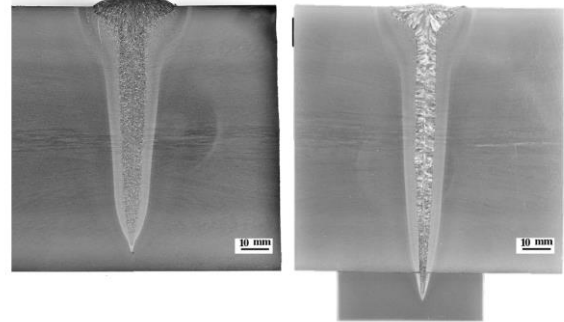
Macrograph. Left, butt welding, without filler. Right, butt welding with Ni foil.
